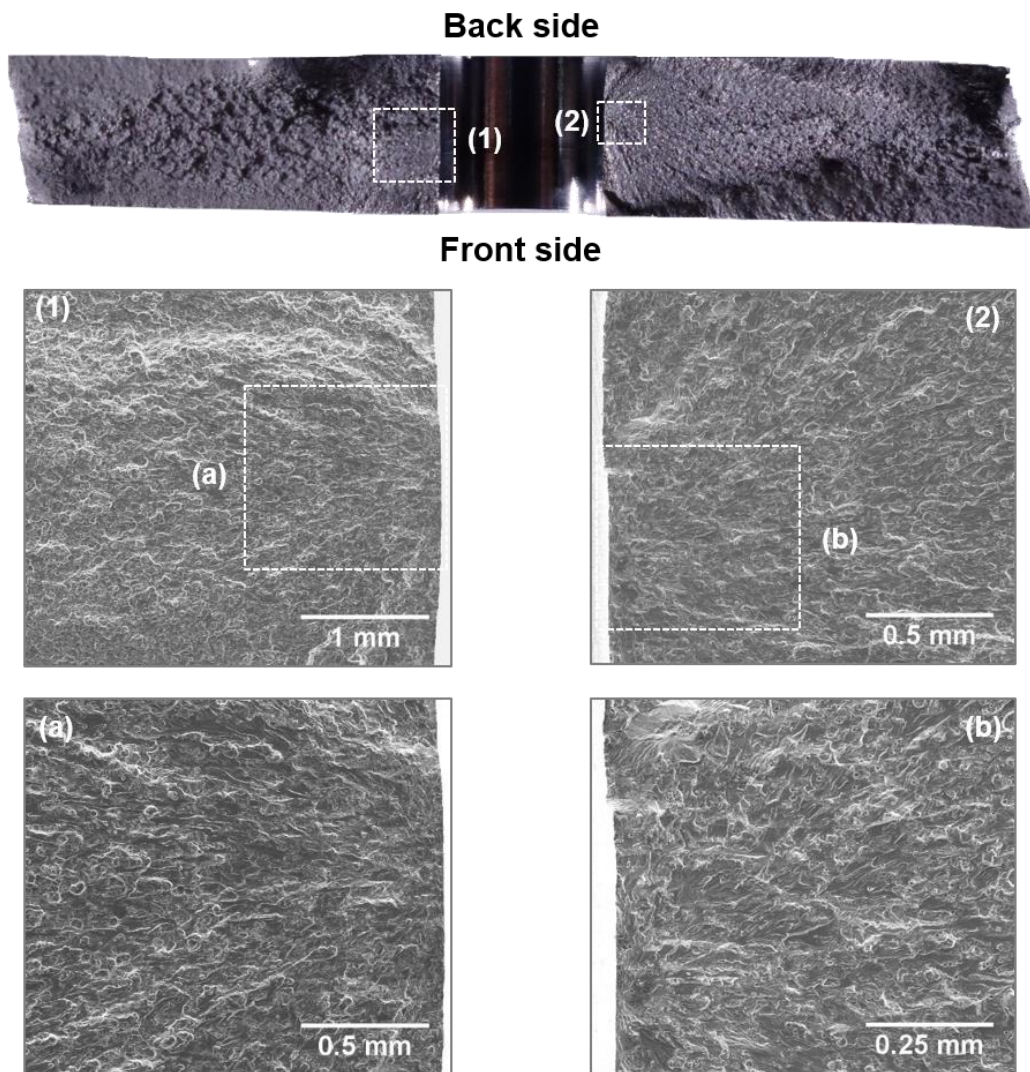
Fracture surface morphology of the un-expanded specimen, U3. The optical micrograph on top shows the whole fracture surface. SEM images on the left and the right show the origin of fatigue cracks initiating from left and right edges of the hole, respectively. The fatigue crack initiated on the left, did not approach any of the specimen faces and remained sub-surface until specimen failure.
